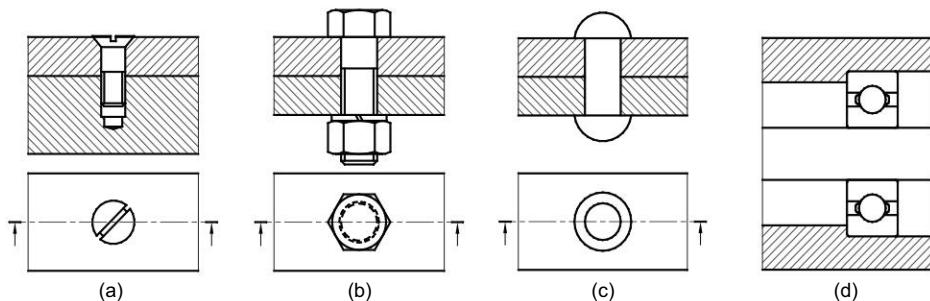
Parts left unsectioned (a) Screws (b) Nuts, bolts and washers (c) Rivets (d) Shaft and bearings
